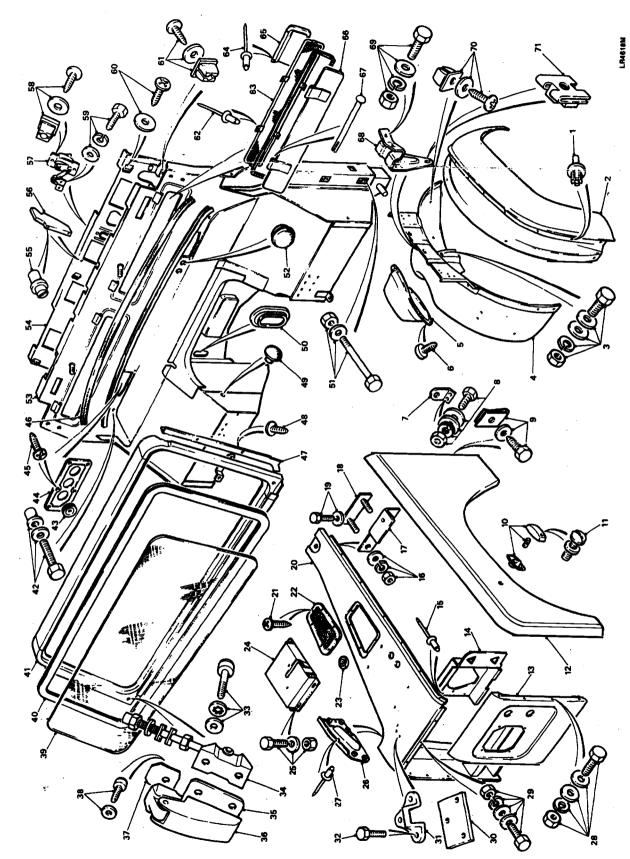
Front wing and scuttle assembly 12/24 volt vehicles
